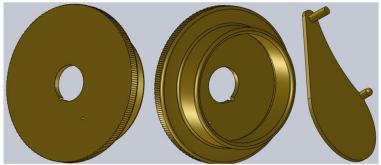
Front and back view of the eyepiece, with rotating eyepiece cover.
